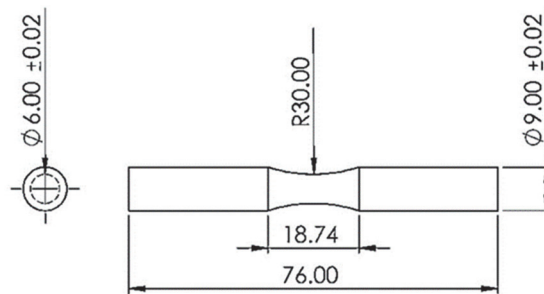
The shape and dimensions of specimens in the experimental dataset for the rotary bending fatigue test (units in mm) [17].
